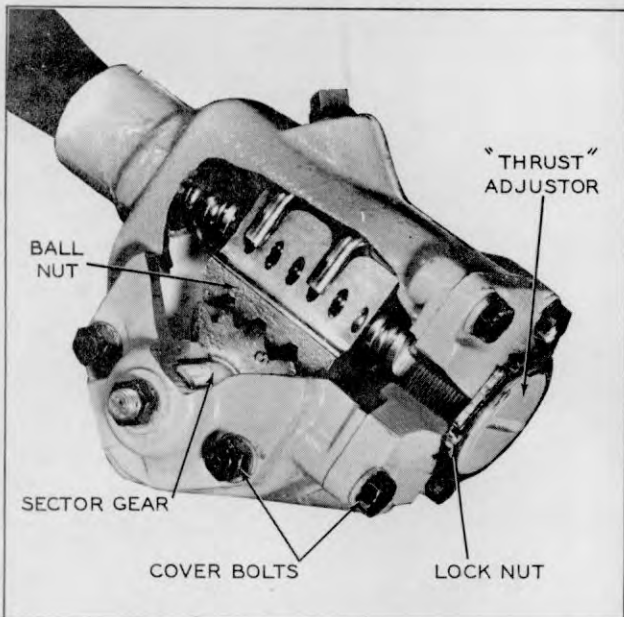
Steering Gear Thrust Adjustment (Worm Bearings)
